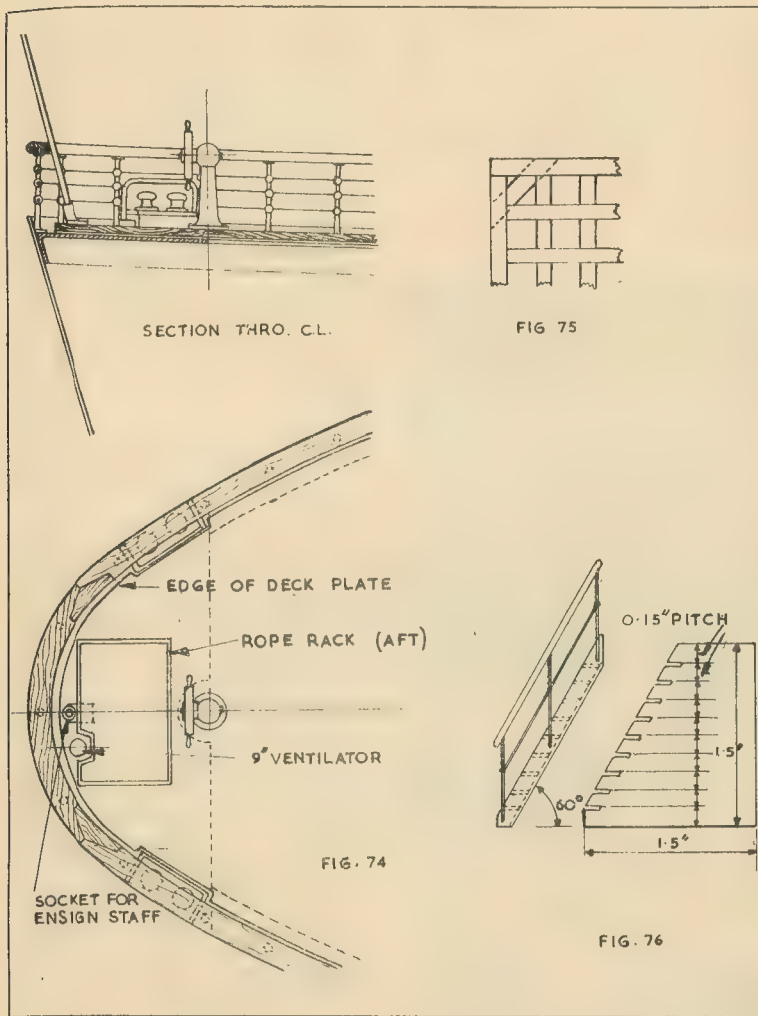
Shelter deck at stern showing rails, rope rack and other details. Fig. 75: Corner of forward rope racks showing support (not to scale). Fig. 76: Ladder and jig for assembly
